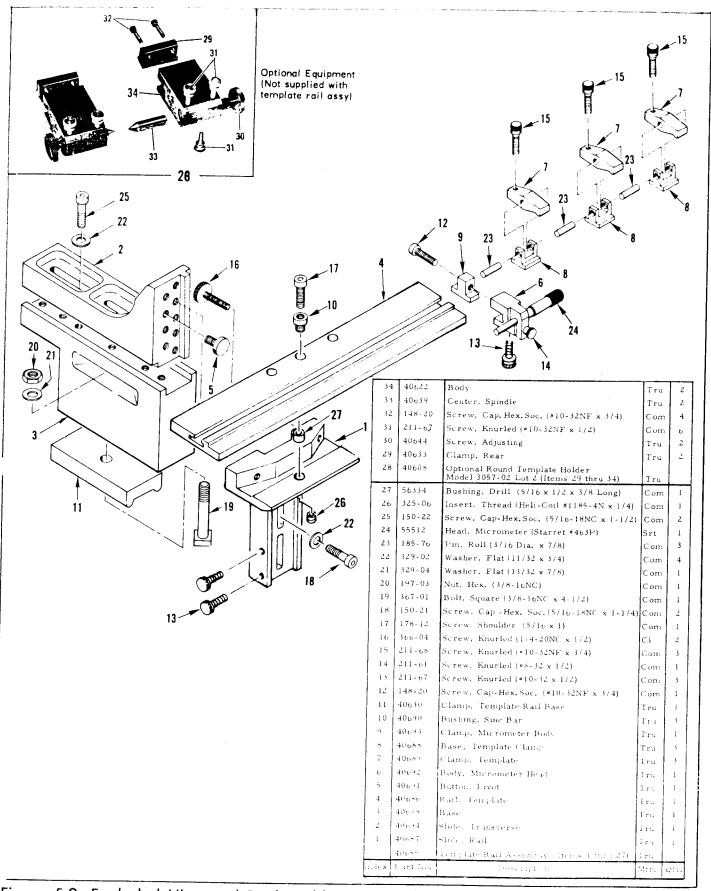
Exploded View and Replaceable Parts List for =40685 Template Rail Assembly.
